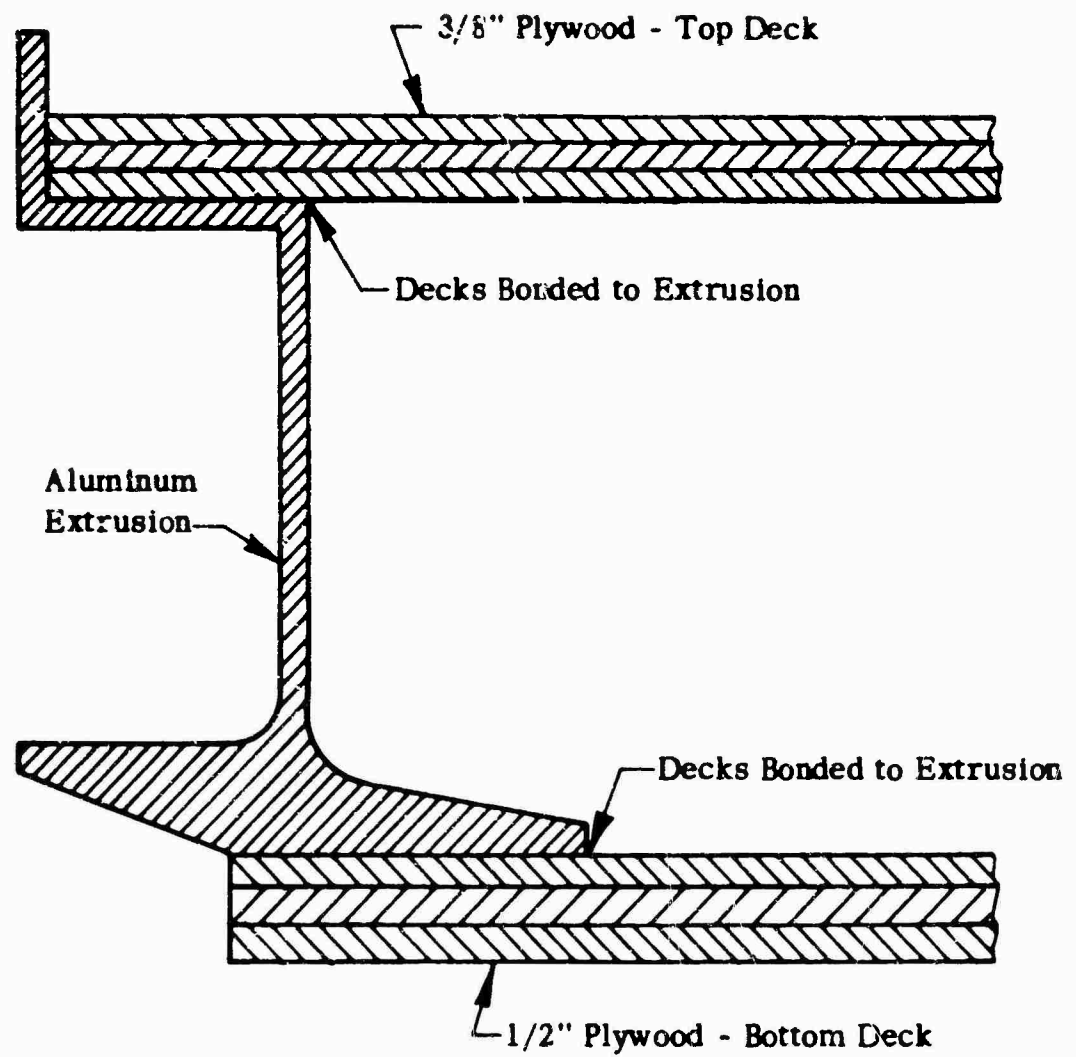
SECTIONAL VIEW OF ALUMINUM EXTRUSION
